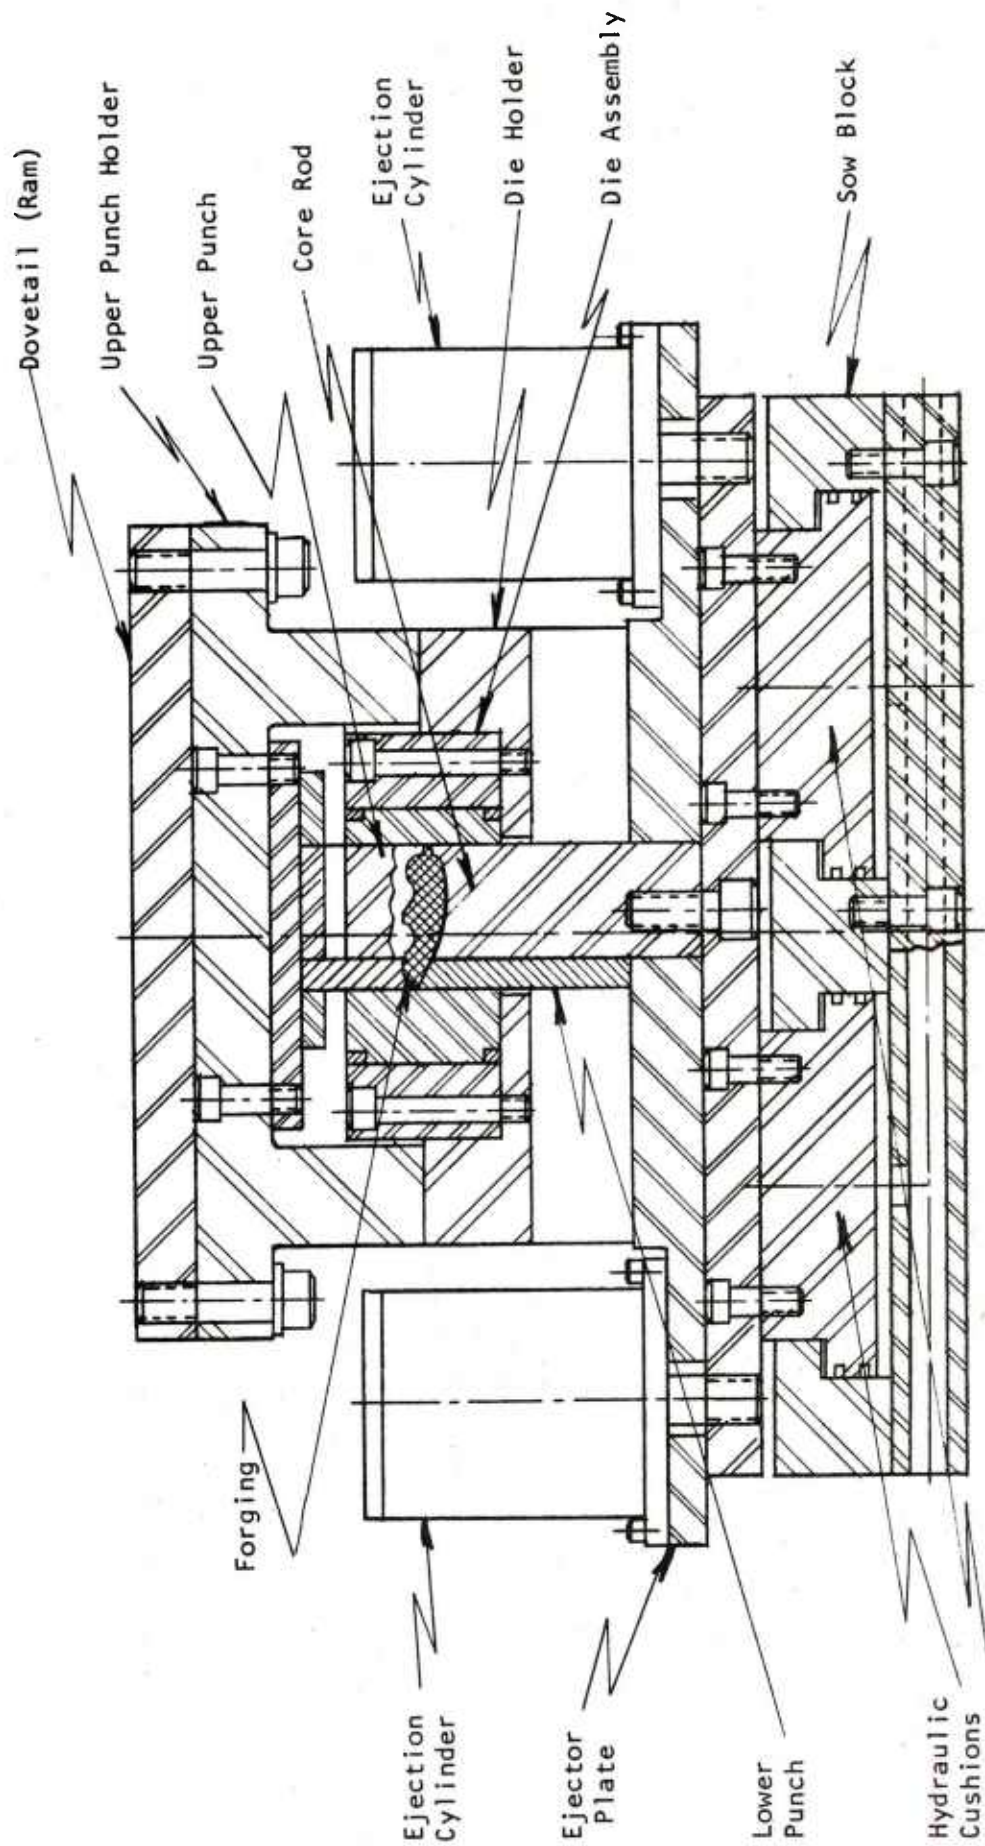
Longitudinal Section View of Die Set for P/M Forging Accelerators
